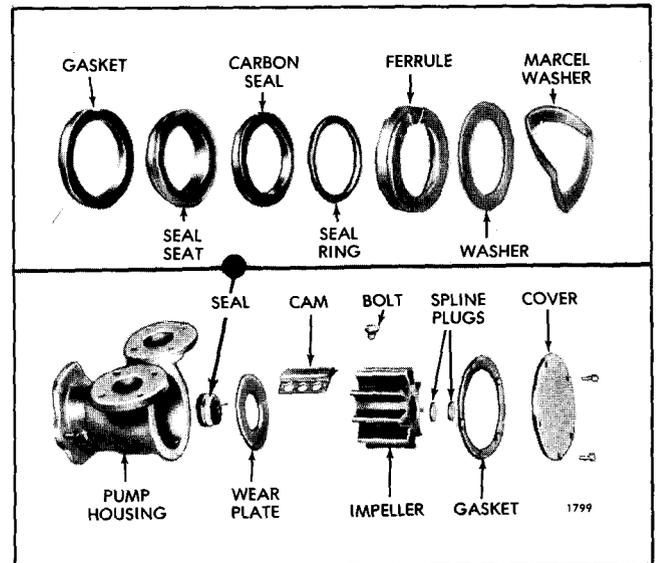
Raw Water Pump Details and Relative Location of Parts
